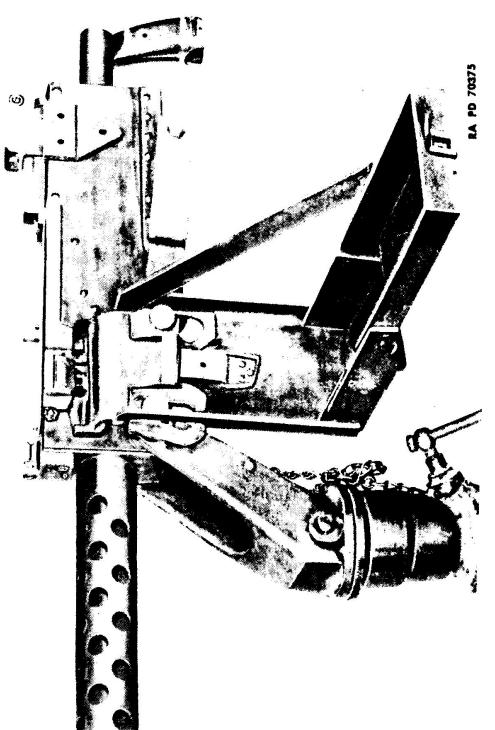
Cal. .30 Machine Gun Mount M48 with TAC Holder for Ammunition Box M1
